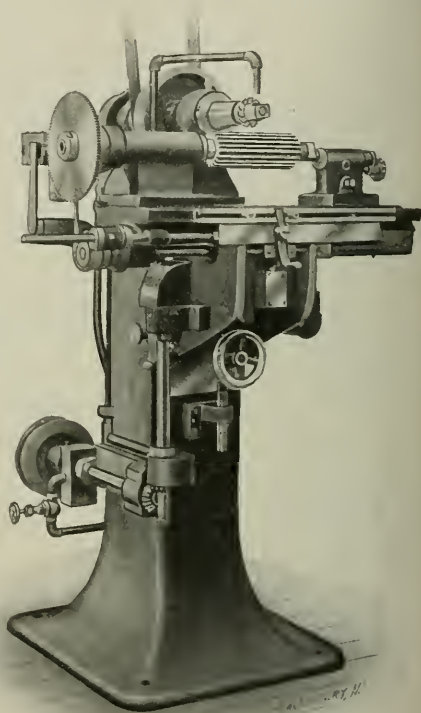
Sloan & Chace Automatic Gear Cutter.
